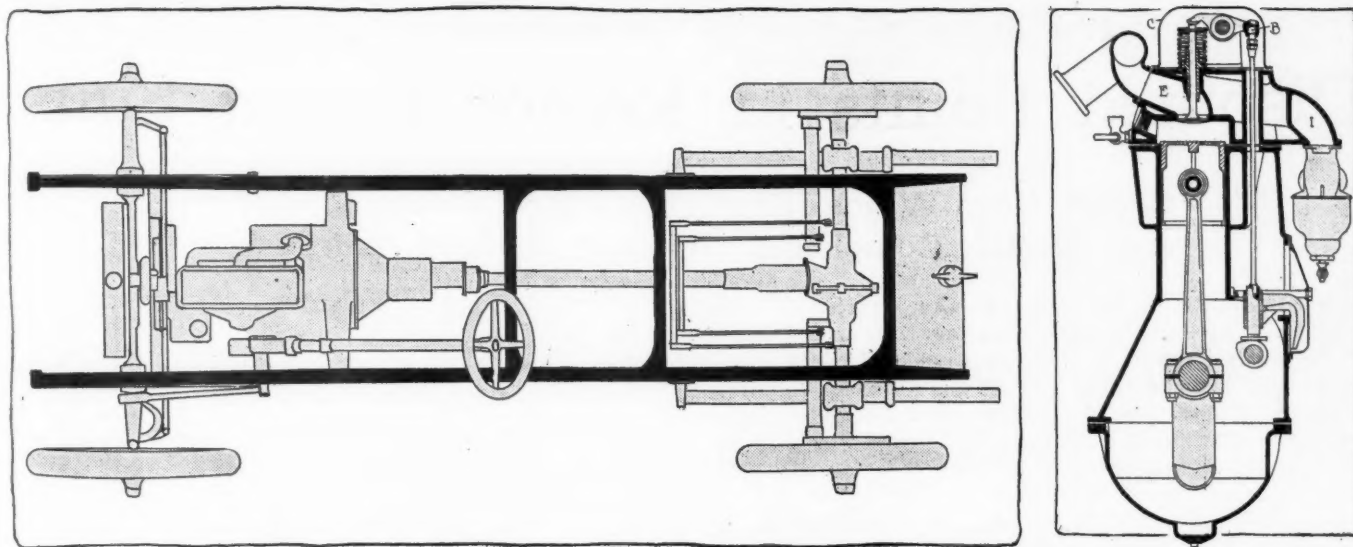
At the left—Plan view of chassis of new four-cylinder Oldsmobile, showing unit power plant left drive and center control and mounting of the fuel tank at the rear. At the right—Cross section of motor, showing valve mechanism in removable head
